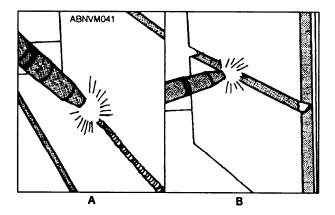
Welding a fillet and butt joint in the horizontal position.
